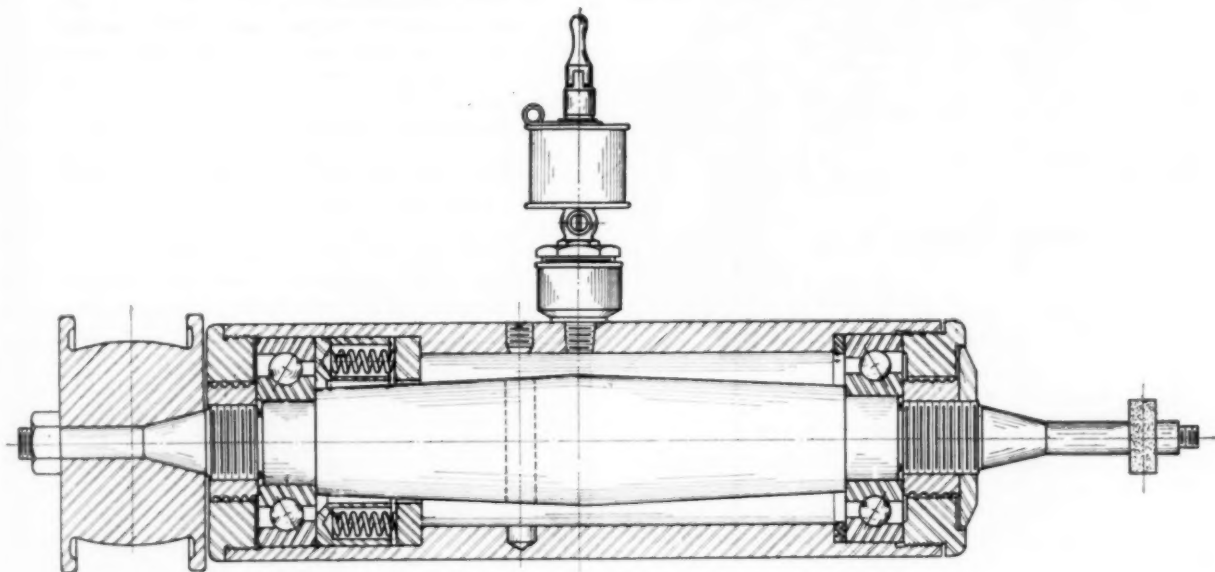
SPRING-ADJUSTED SPINDLE, SMALL HIGH-SPEED GRINDER
